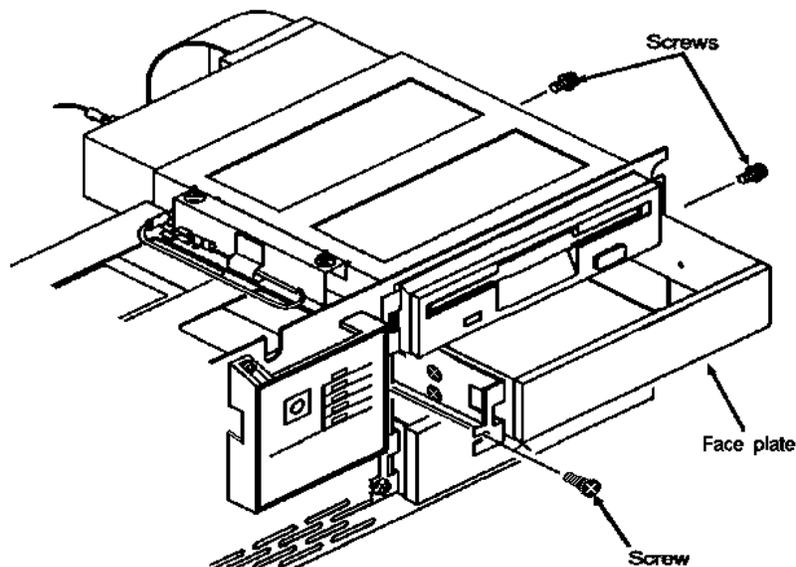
DRIVE BAY FACE PLATE REMOVAL
